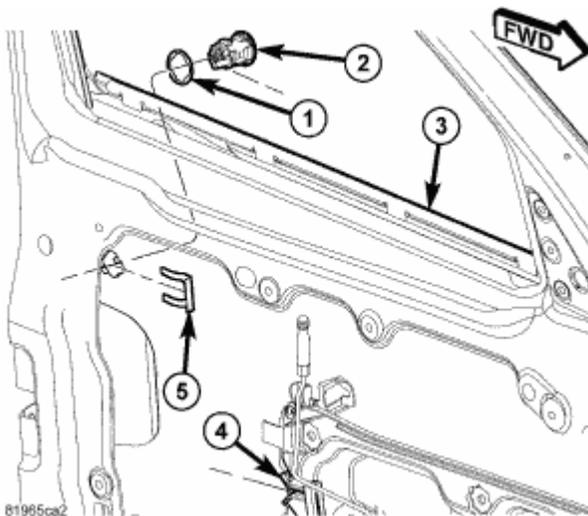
Gasket, Door Lock Cylinder, Door, Carrier Plate & Door Lock Cylinder Retainer
